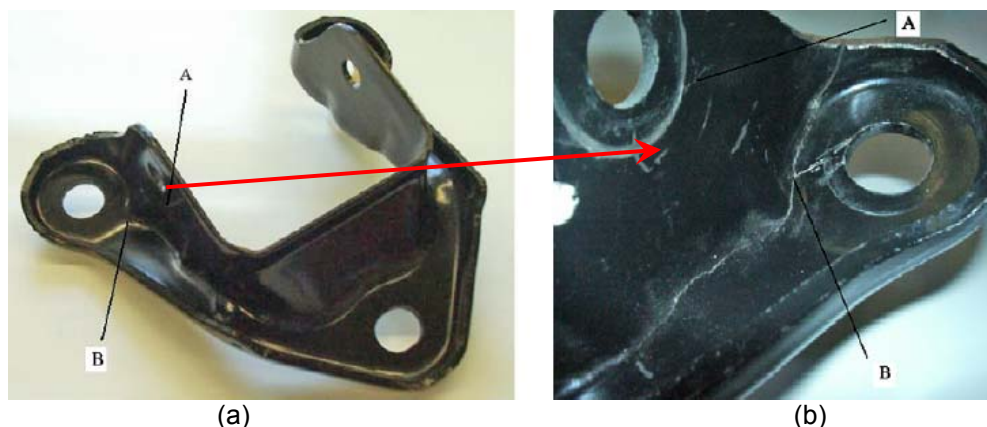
Case study - formed automotive/vehicle suspension component: a. a formed component; b. detail of the fretting fatigue damaged location [30]
